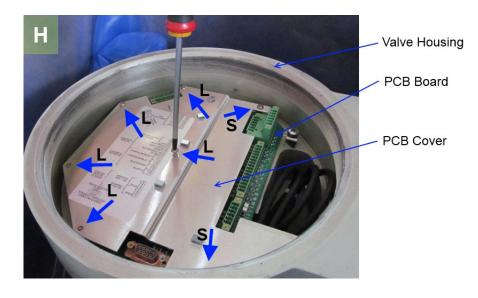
Install Covers and Connect Hydraulic Supply and Drain
